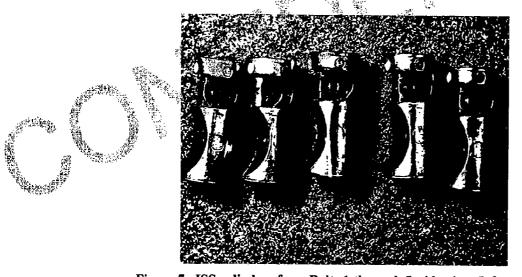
ISS cylinders from Bolts 1 through 5, side view (left to right)
